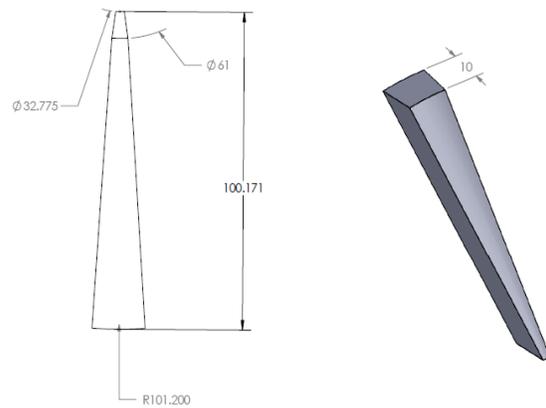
One pole piece dimensions – Low Speed Rotor.
